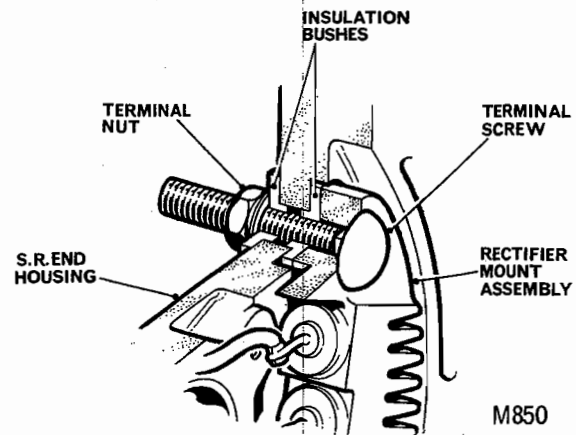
SECTION THROUGH SLIP-RING END HOUSING
